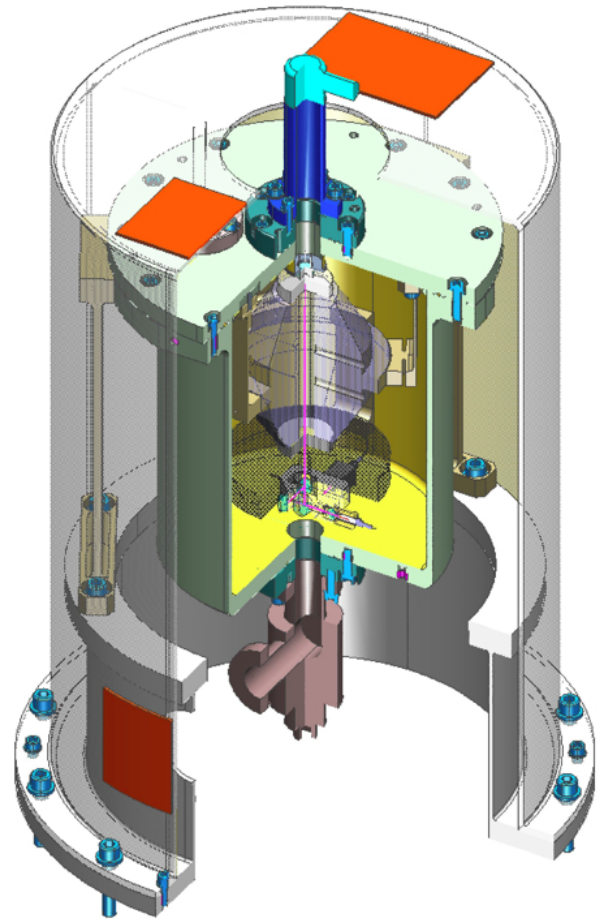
Cut-away view of laser frequency stabilization cavity assembly
